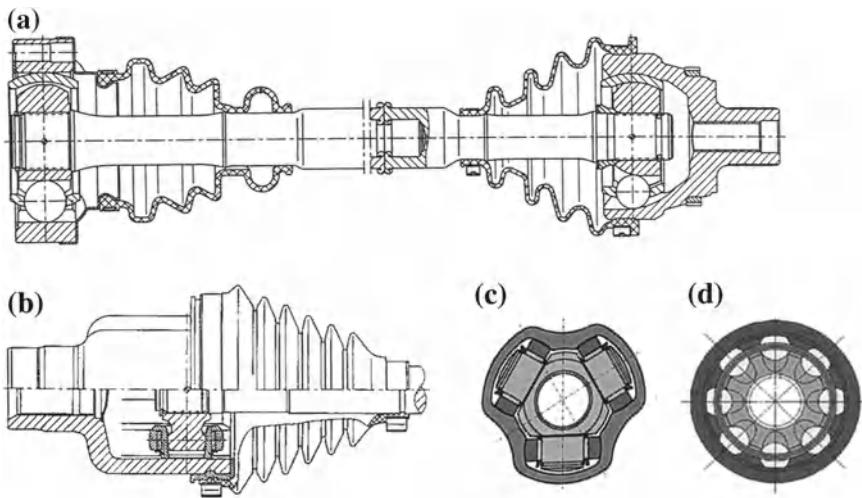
Complete half shaft for a front-wheels drive car a with a fixed joint on the right and a sliding joint on the left. Scheme b shows a tripod joint that can be used in place of a sliding Rzeppa joint. Details c and d show the cross sections of these joints (from Genta and Morello 2009)
